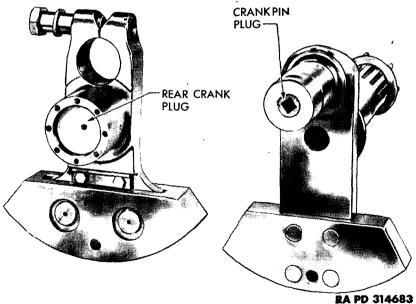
Front and Rear Crank Sections, Showing Plugs
